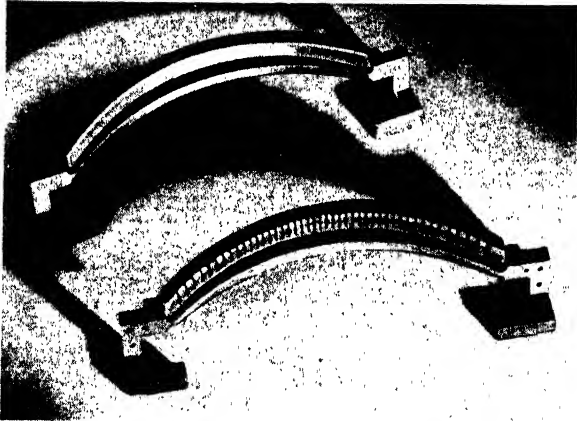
Typewriter part that has been produced as a die casting (as shown in unmachined form) and also as a permanent-mold casting (as shown with slots and some other machining done). Both parts are in aluminum alloy. It was anticipated that the die casting would result in considerable saving, especially in machine work, but it developed that the slots could not be cored, that only 4 of 18 holes could be cored, and that some flat surfaces, which had to be machined on the permanent-mold casting also had to be cleaned off in the die casting. As a result, the saving on the latter amounted to only $3\frac{1}{2}$ per cent. Both types of castings are being continued so as to have two sources of supply.
